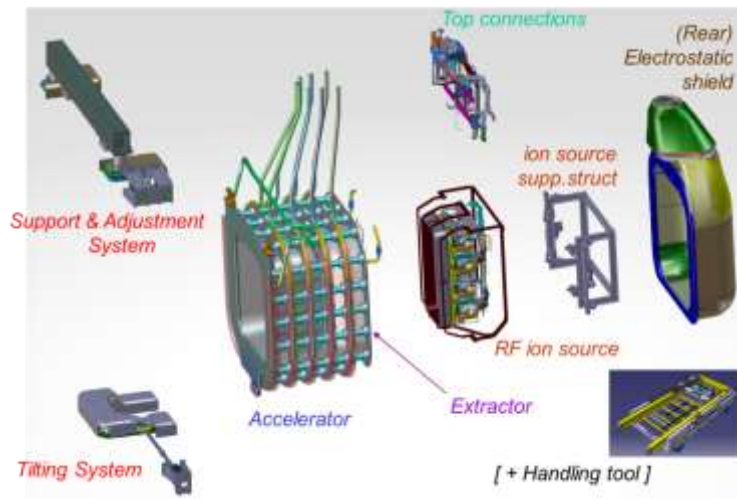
CAD exploded view of the MITICA Beam Source
